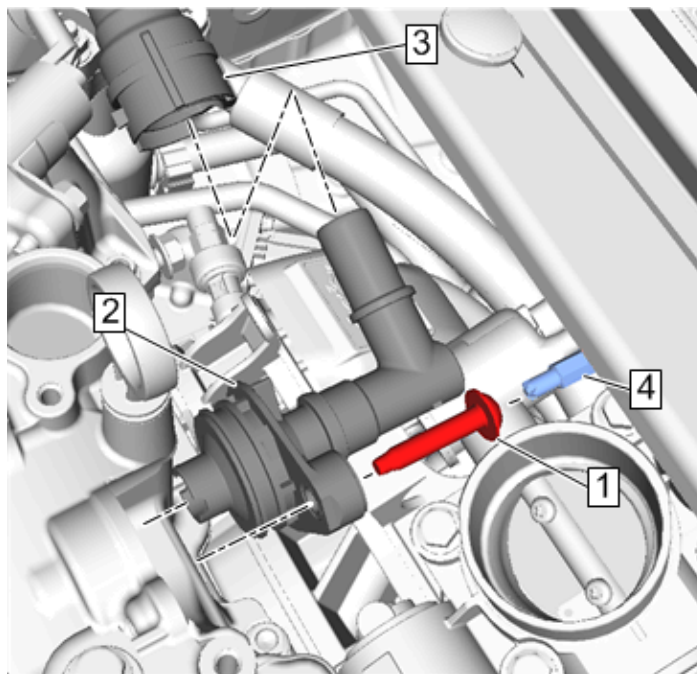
Positive Crankcase Ventilation Valve, Tube, Bolt And Special Tool
